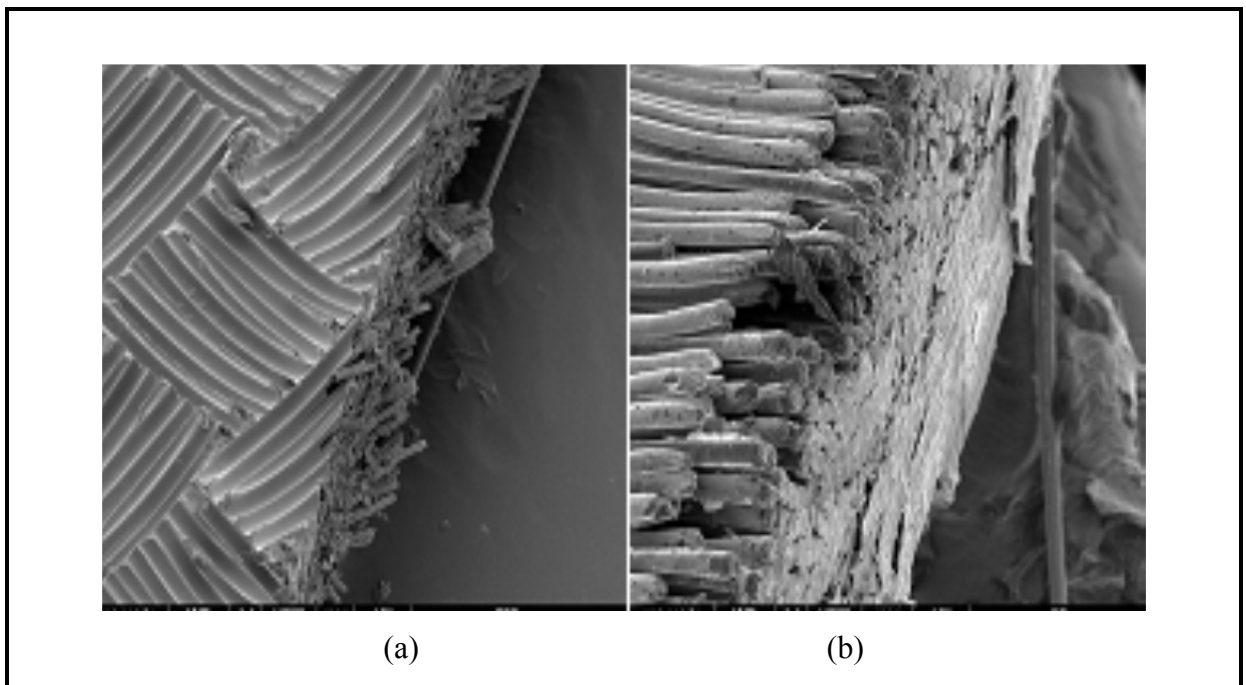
Comparison of cutting by laser (a) and mechanical machining (b)
